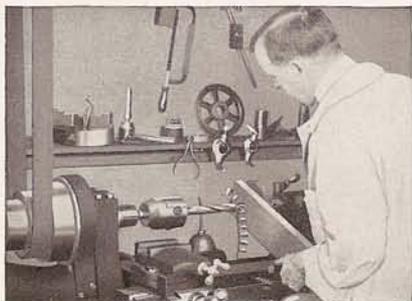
Lathe Used as Drill Press for Drilling Hole in Flat Piece of Work.
